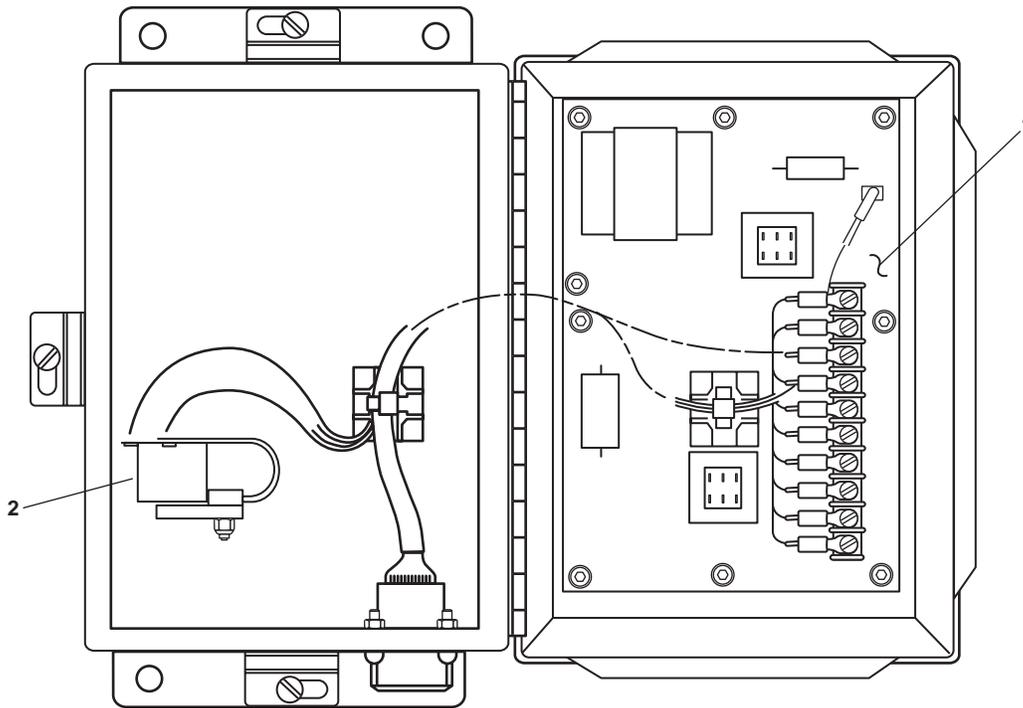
Remote Indicator (Alarm) Assembly, Internal
